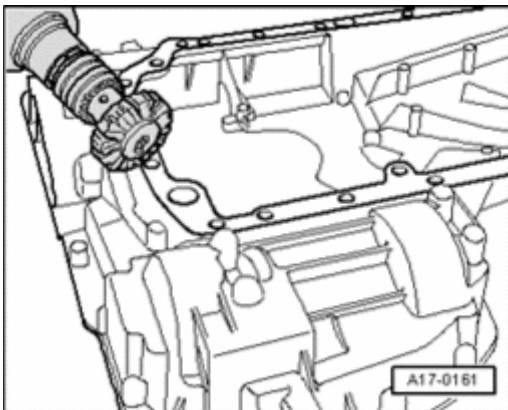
Using Rotating Plastic Brush To Remove Remaining Sealant From Oil Pan (Upper Part) And Cylinder Block
